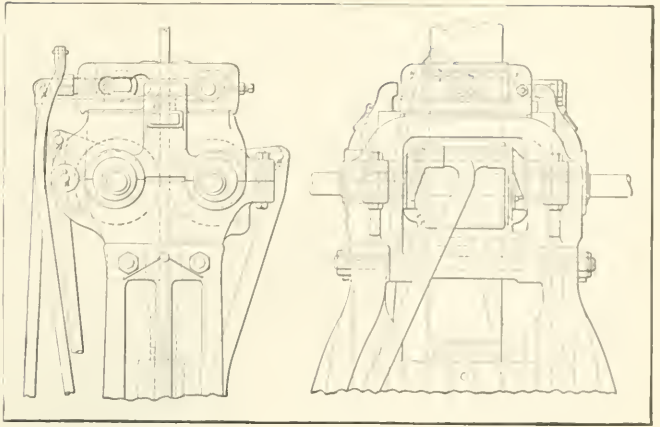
Lifting Head having Eccentric Adjustment and Board Clamps above Friction Rolls
